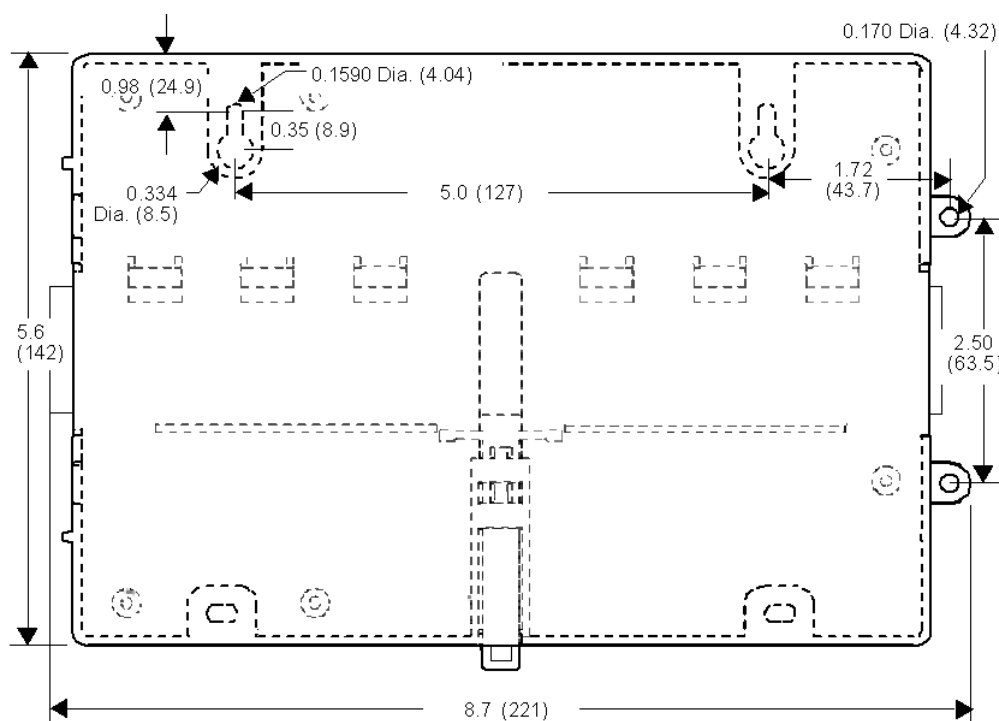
FX70 Tab Mounting Dimensions, in. (mm)
